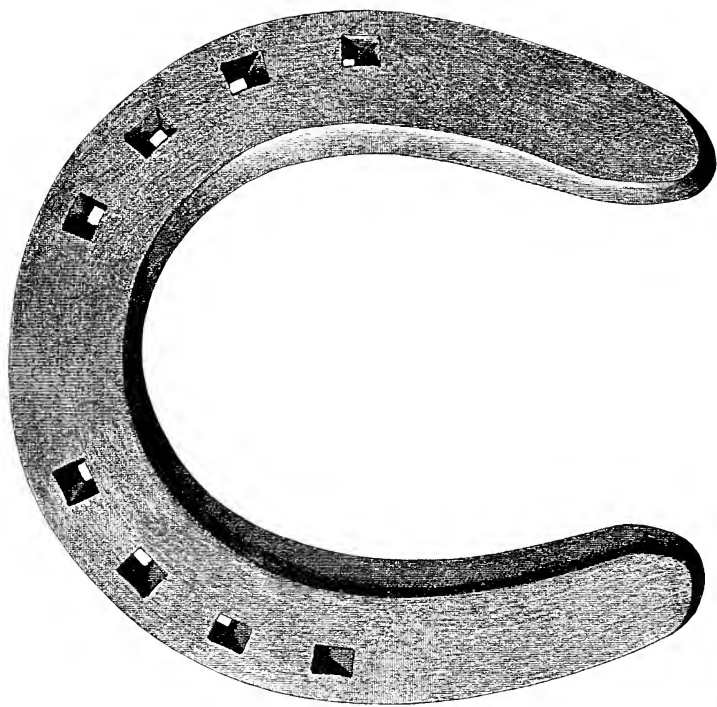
Cart horse stamped fore shoe (for show purposes).
